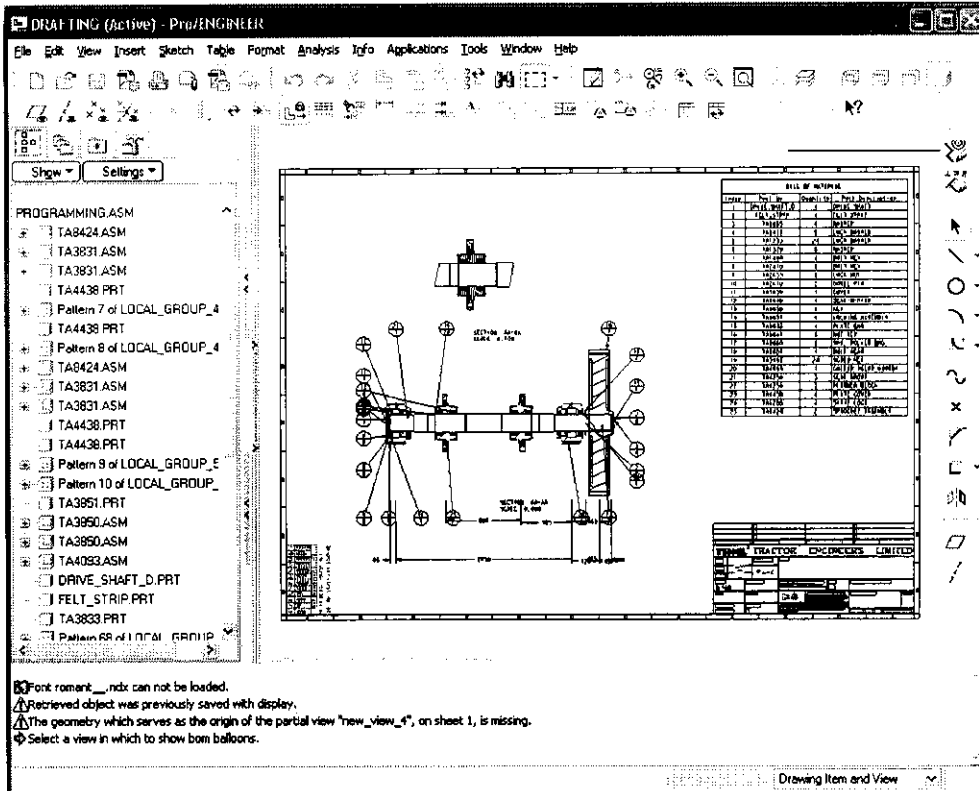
Drafting output of Open type Drive Wheel Assembly
